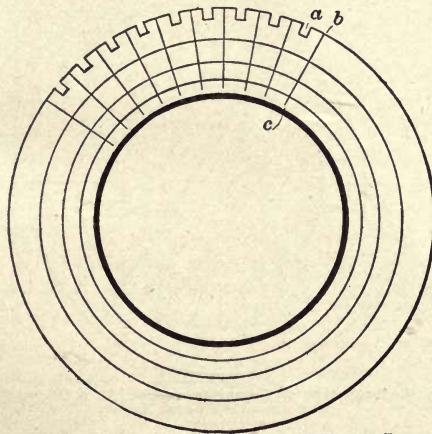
Slots Cut in Casting for Commutator for Sawing apart Segments, and for Lead Wires
